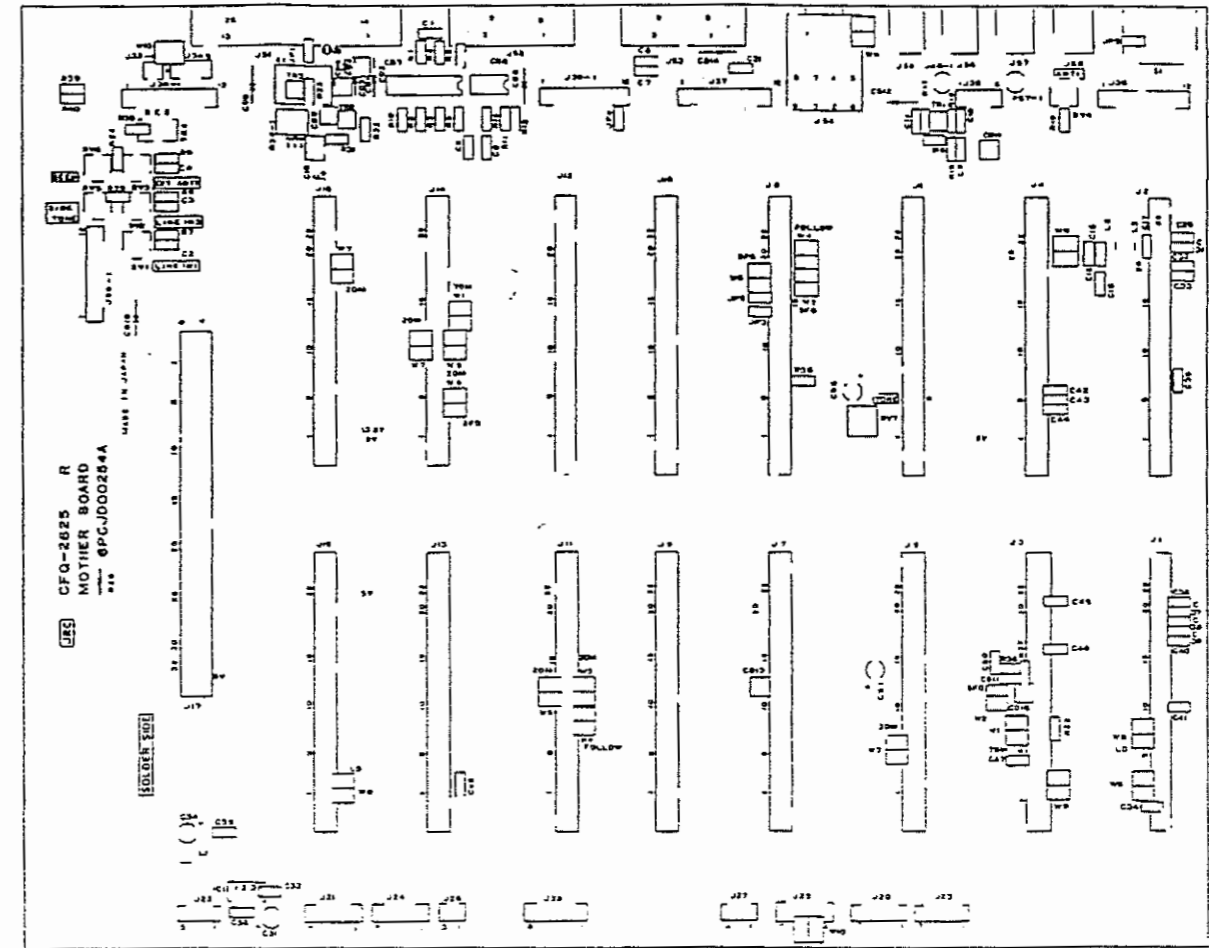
MOTHER BOARD (CFQ-2625R) Component Layout
